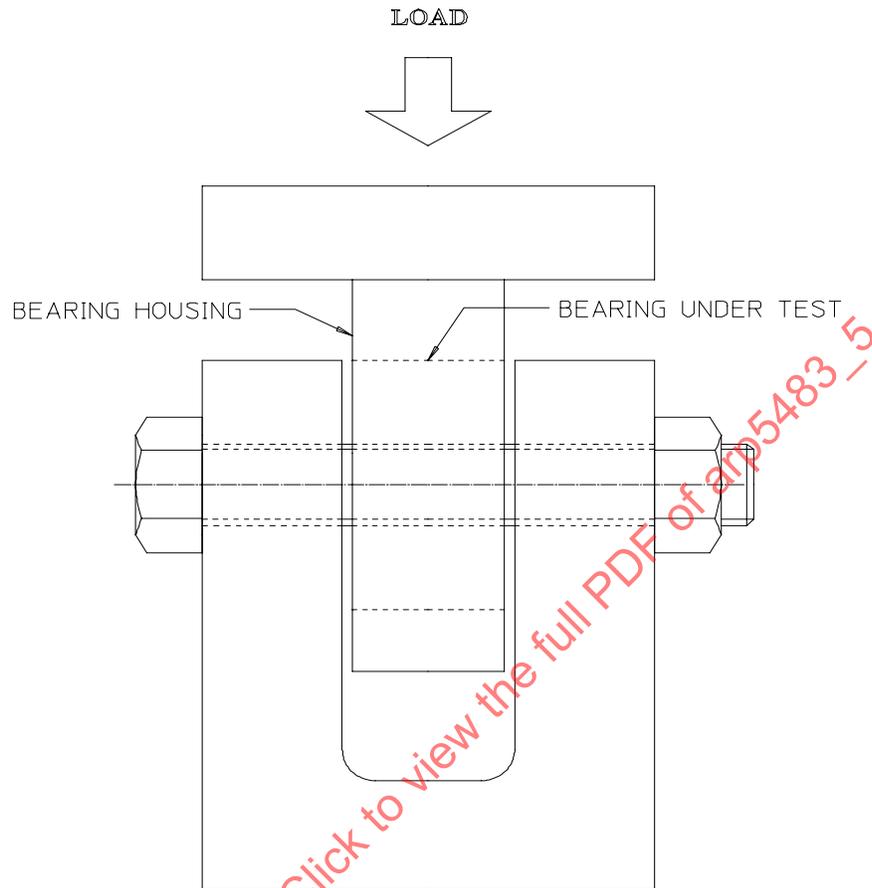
SCHEMATIC FOR RADIAL LIMIT/FRACTURE LOAD TEST
